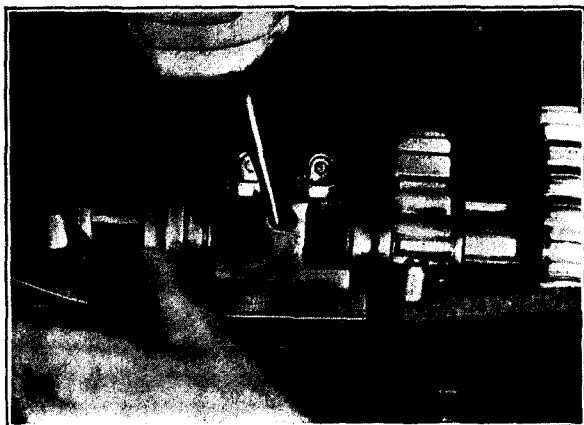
Measurement the movement of the yoke which determines the drum clearance. This should be from 3-32" to 5-32".
